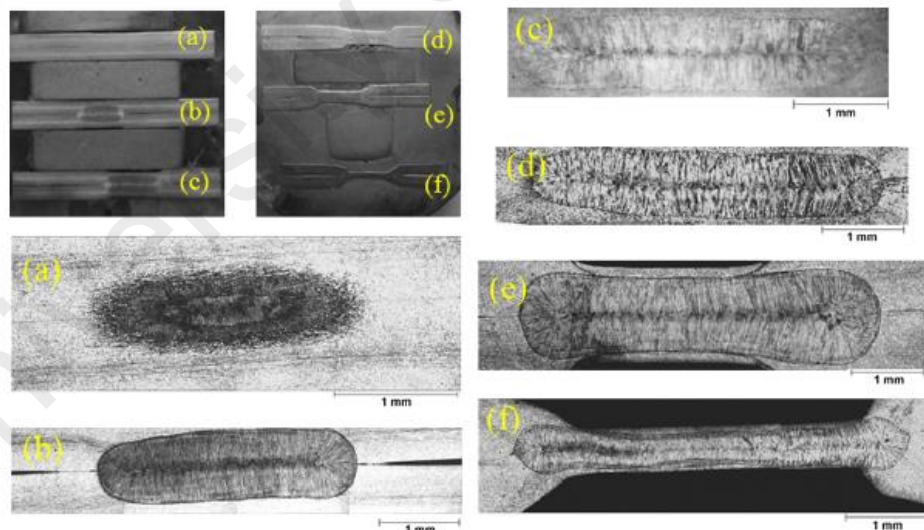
Cross-section images of the joint welded by (a) 4 kA, (b) 5 kA, (c) 6 kA, (d) 7 kA, (e) 8 kA, and (f) 9 kA welding currents at constant 4 cycles welding time (Kianersi et al., 2014)
